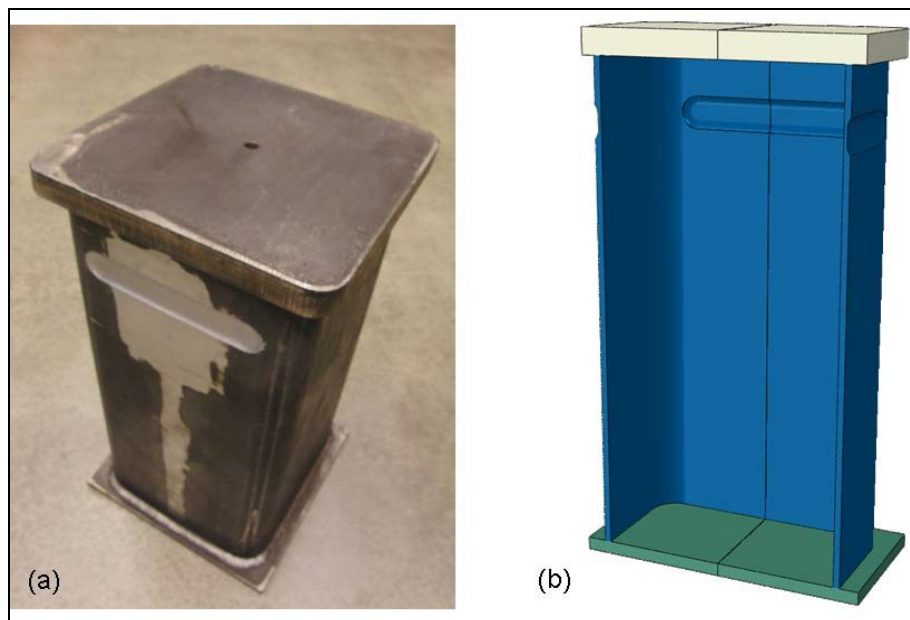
Photographs of Newly Fabricated Crush Tube and Design of Solid Element Based FEA Model
